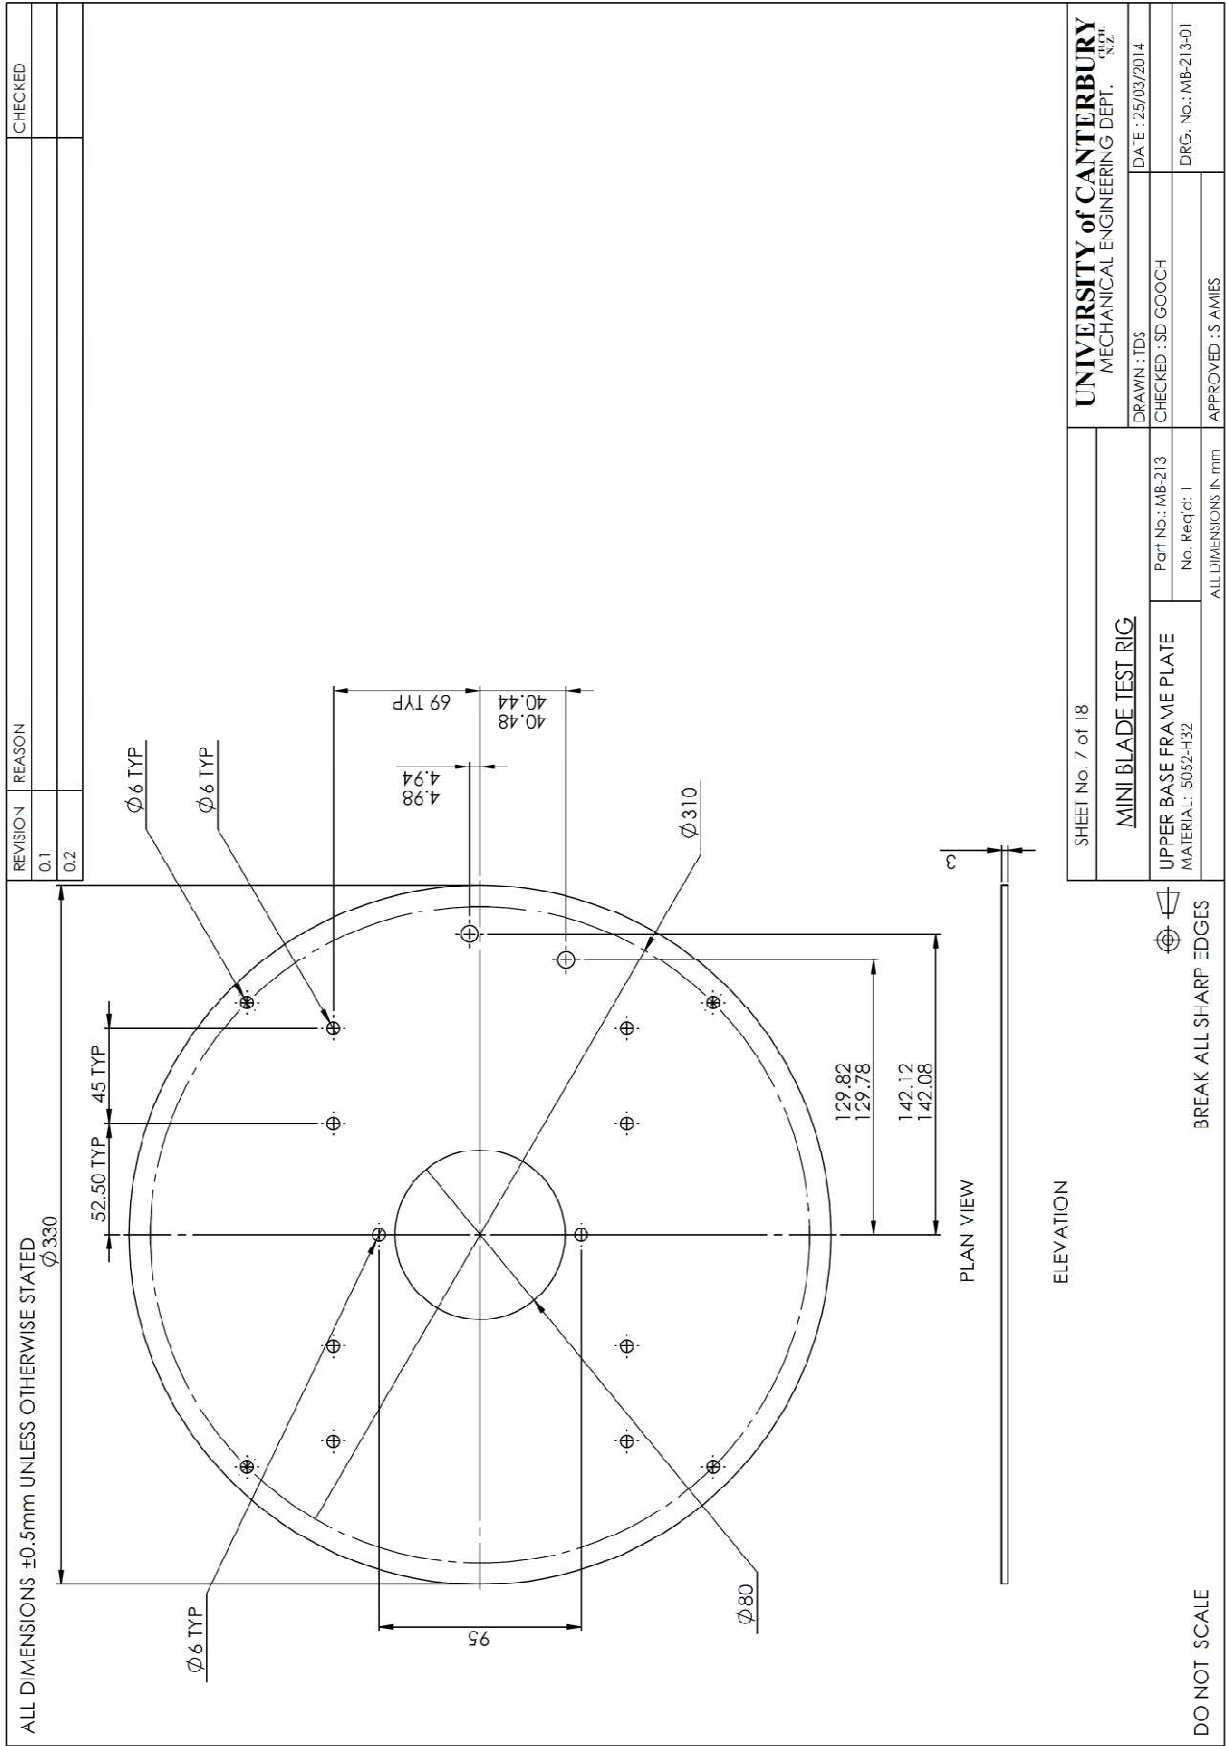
Manufacturing drawing for the upper base frame plate in the variable stroke test rig.
